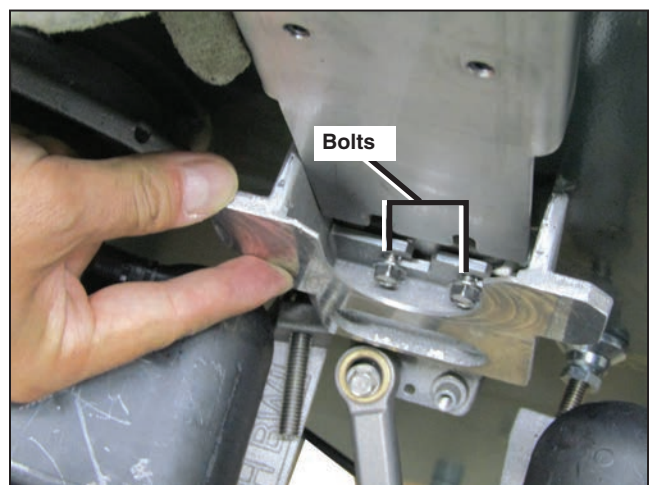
The parking stand extender should be pulled out from between the parking stand bolts and parking stand.
